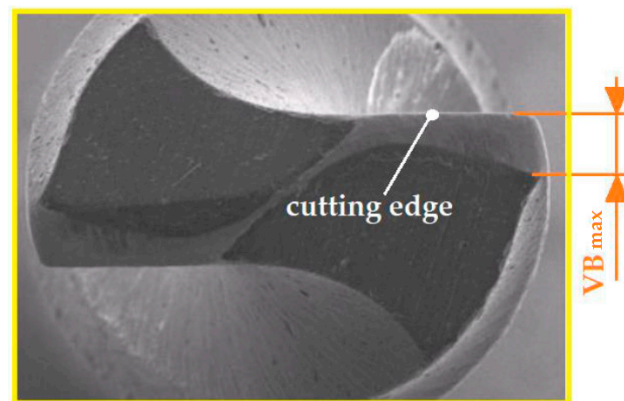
Wear of the flank face of the cutting edge VB_{max} .
